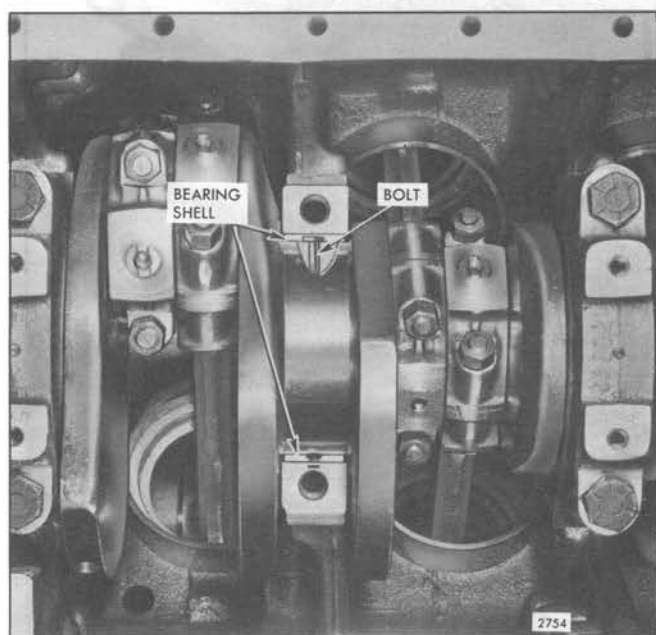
Removing Upper Main Bearing Shell (Except Rear Main)
